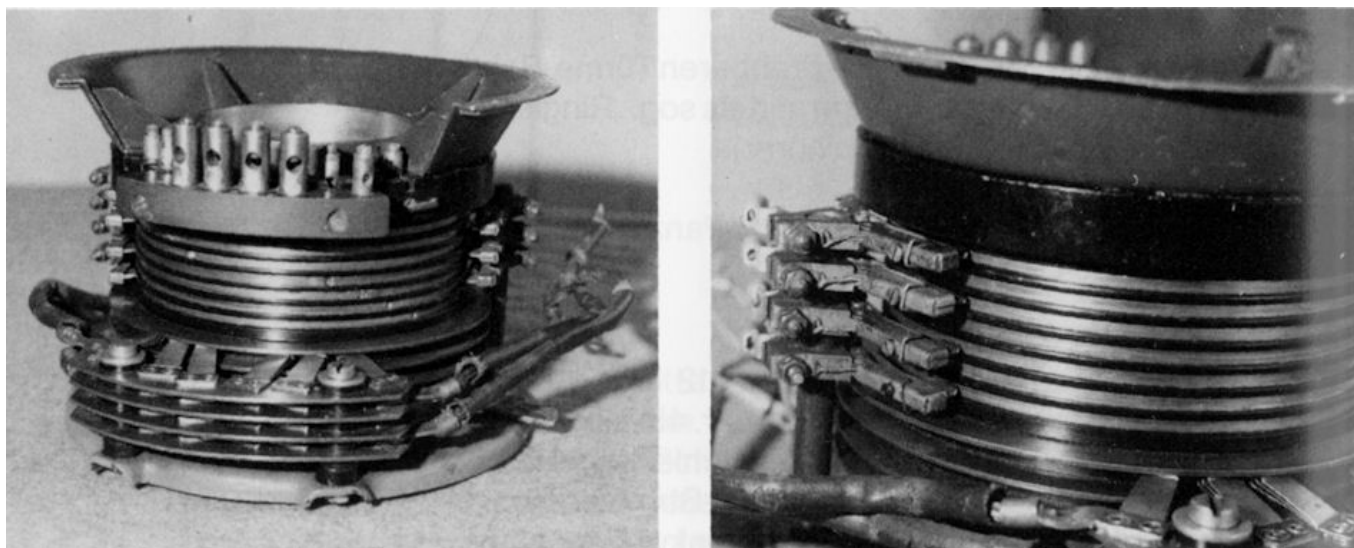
The slip-ring stack assembly of Panzer V "Panther" and VI "Tiger" tanks
